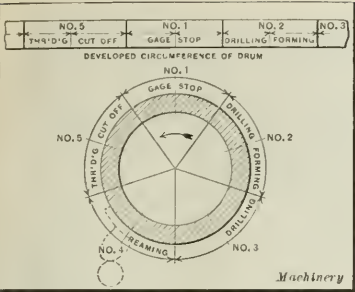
Divisions on Controller Drum, showing Positions of Tools and Cross-section through Drum
